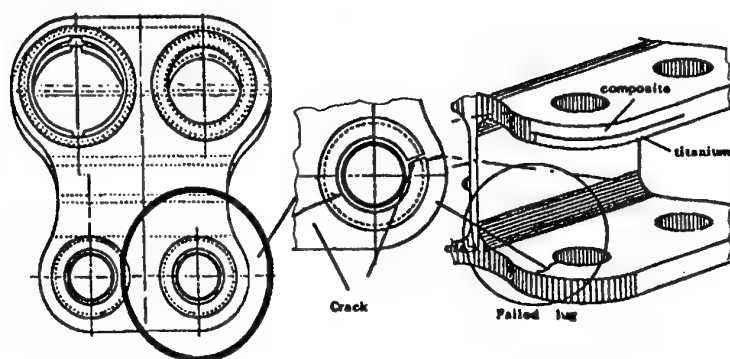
M.R. Outboard Tension Link fatigue crack of the titanium lug
